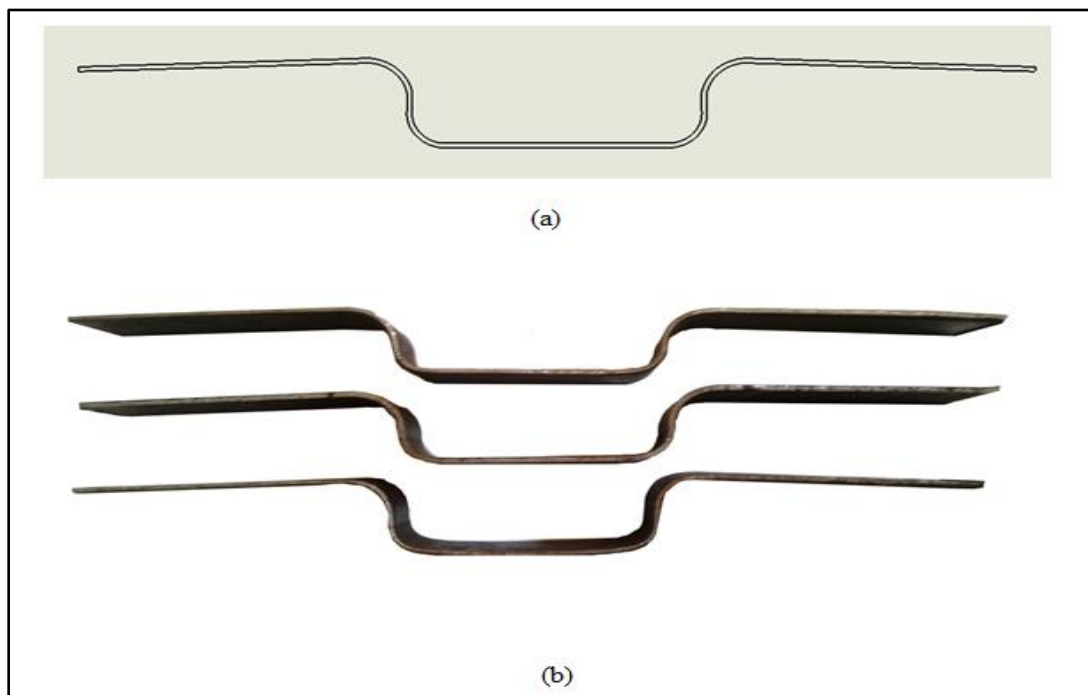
(a) 2D drawing of Galvanized Iron after bending,
